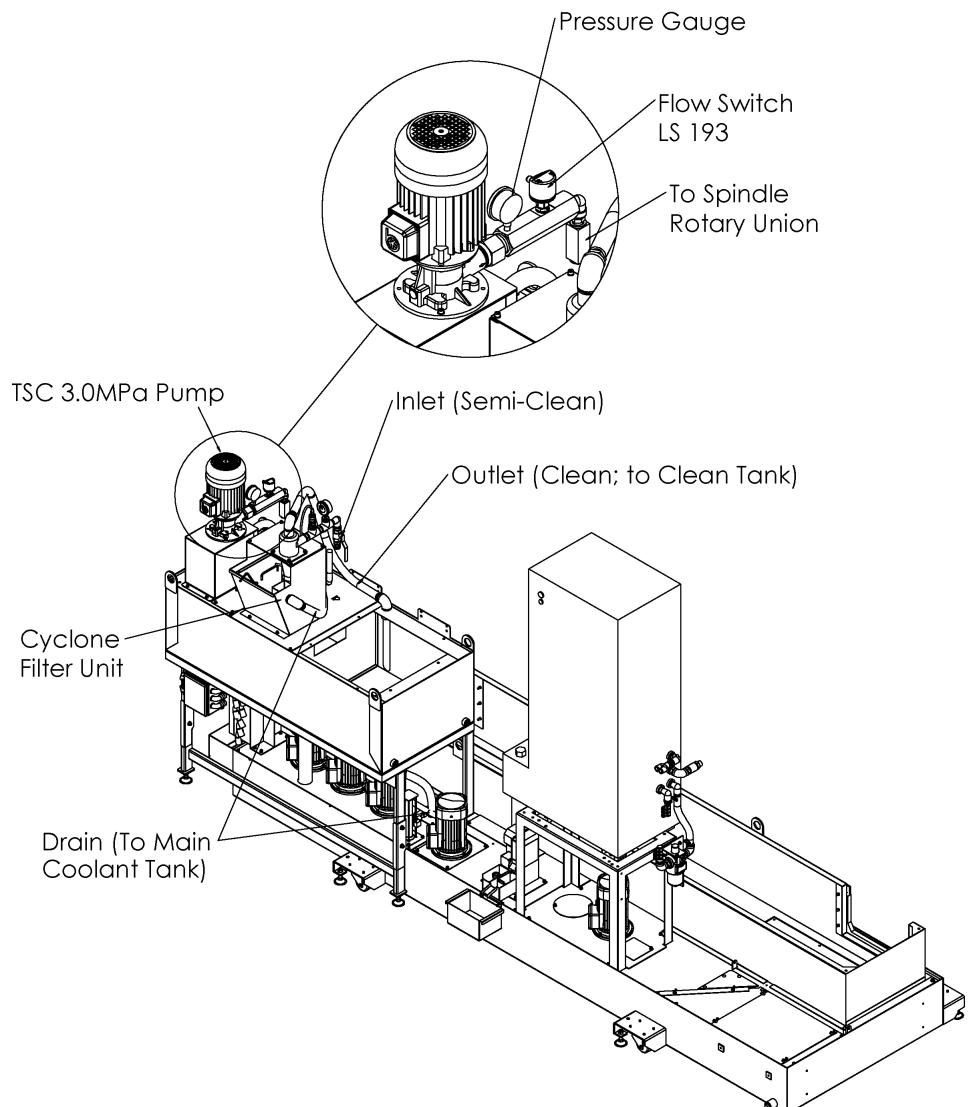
Through Spindle Coolant 3.0MPa (TSC)
